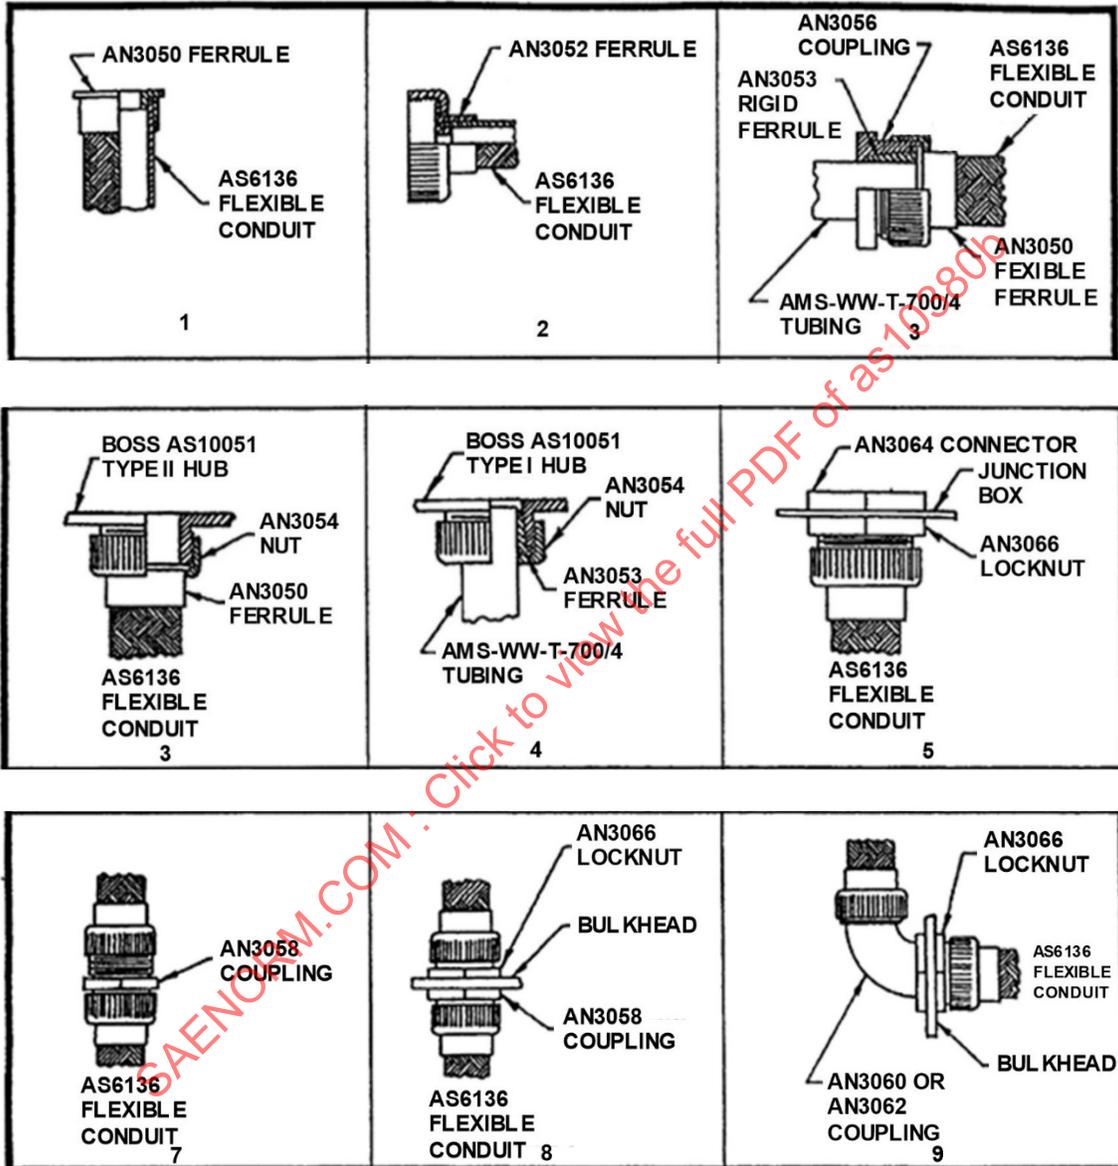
COUPLING INSTALLATION METHODS ON FLEXIBLE CONDUITS, TUBING, OR CABLES
